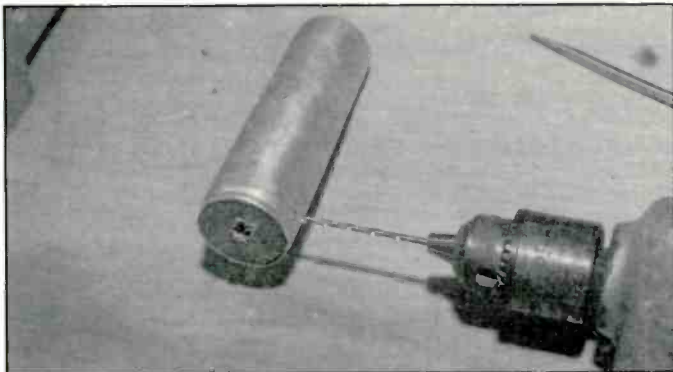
Two small pilot holes are drilled into the sides 180 degrees apart. Small wood screws will be used at these points to hold the rebuilt unit together.
